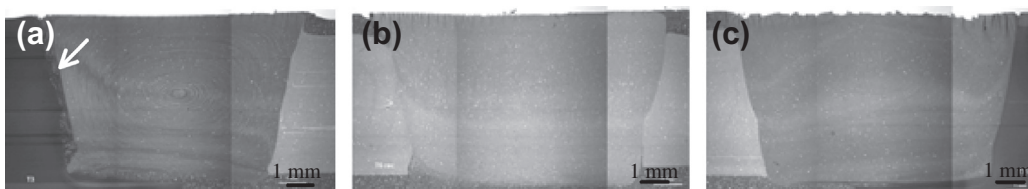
Micrographs of welds performed with increasing axial force: (a) R1500T100F0.75, (b) R1500T100F2.25 and (c) R1500T100F4.
